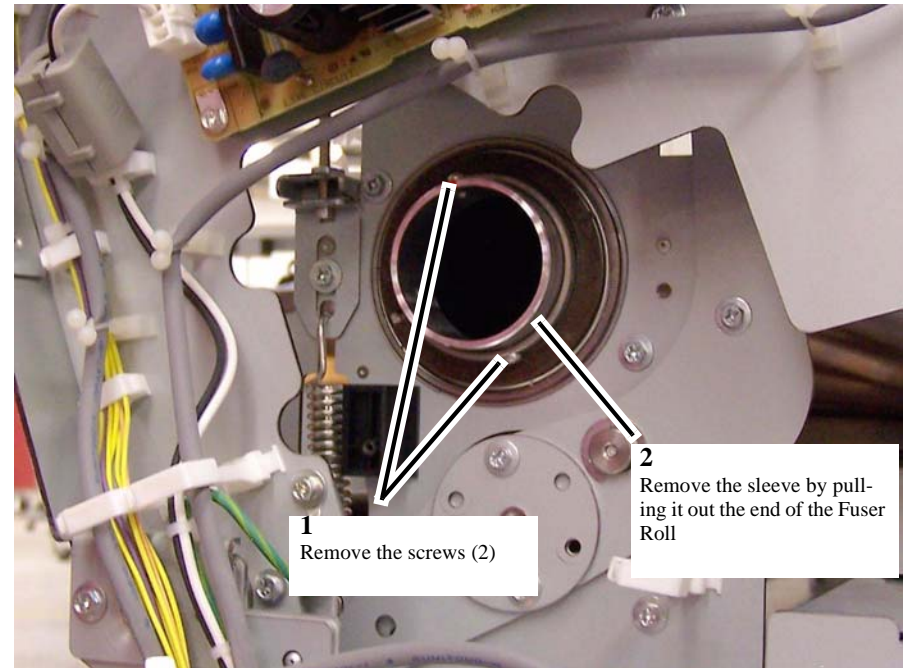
Removing the Sleeve (left end of Fuser Roll)
